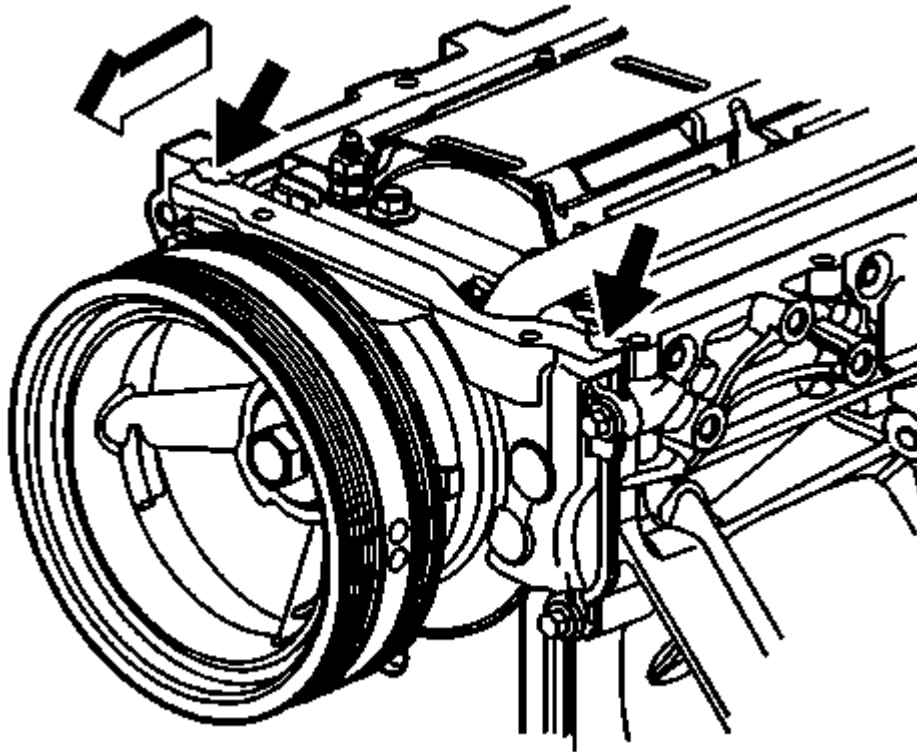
View Of Sealant On Engine Front Cover Gasket Tabs
